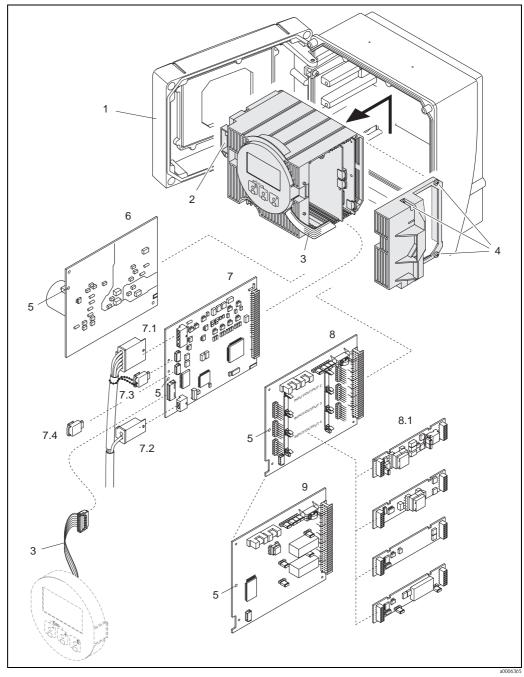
Wall-mount housing: removing and installing printed circuit boards
